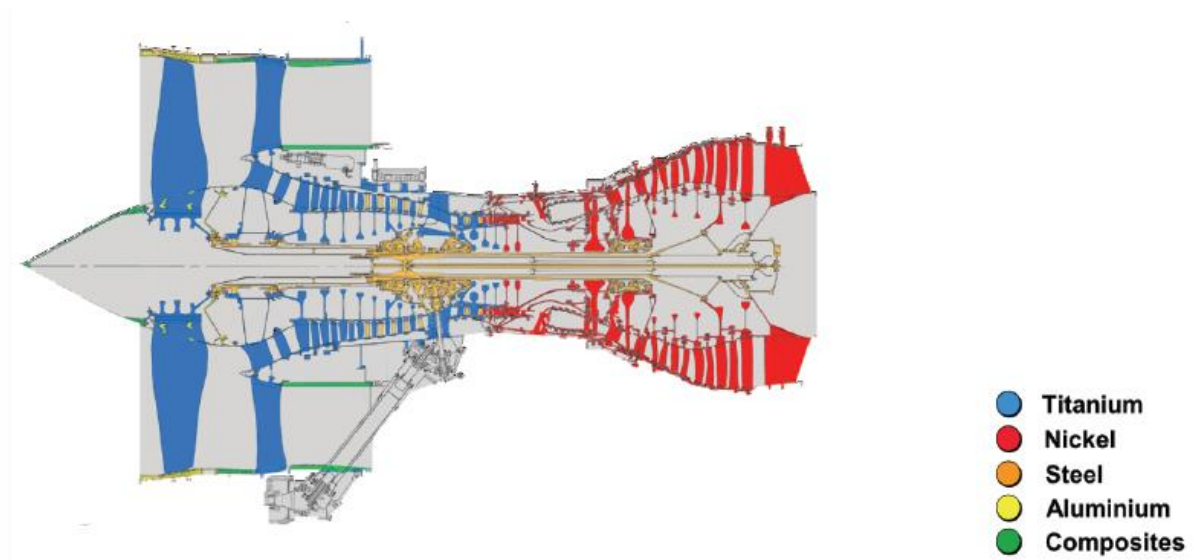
Materials used in a typical gas turbine engine. [6]
